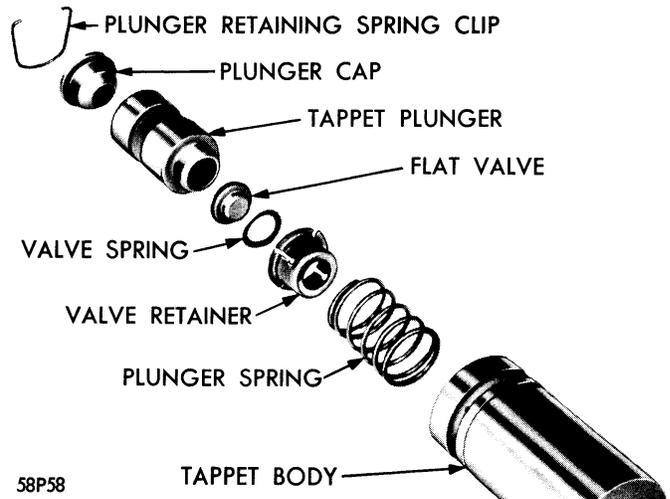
Hydraulic Tappet—Disassembled—350 Cubic Inch Engine
